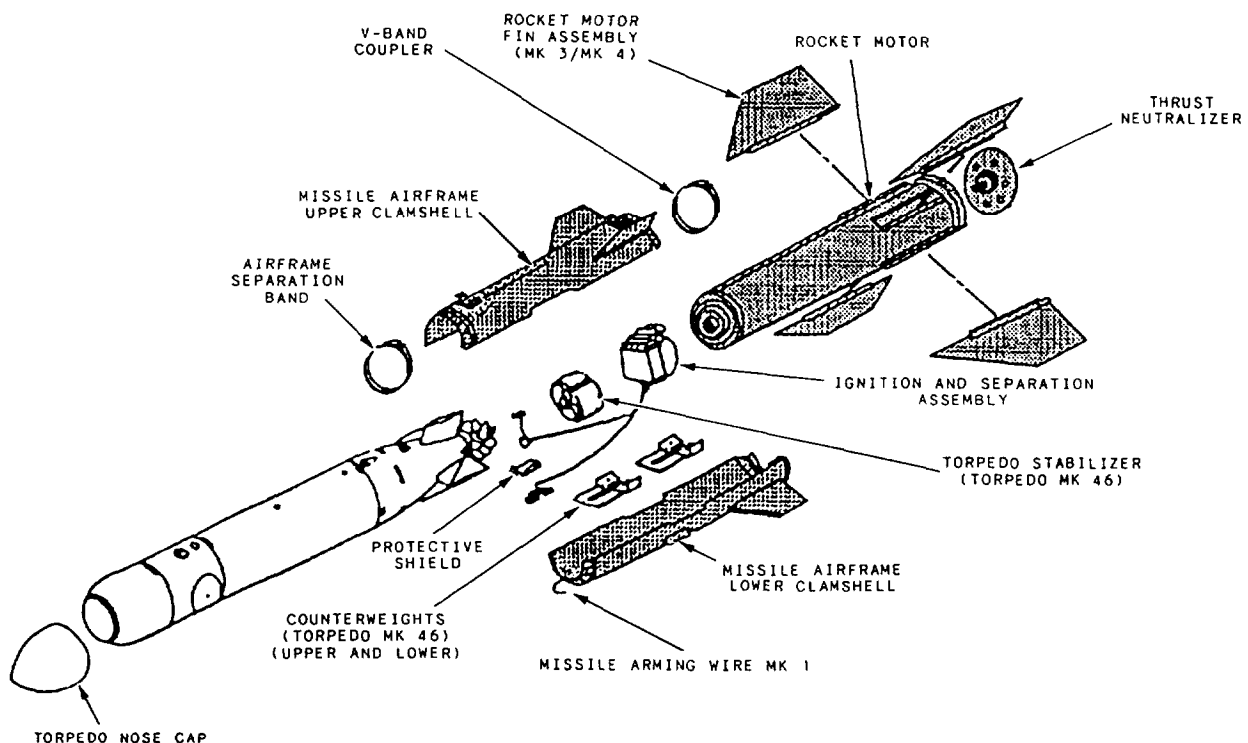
Rocket thrown torpedo (RTT)—exploded view.
